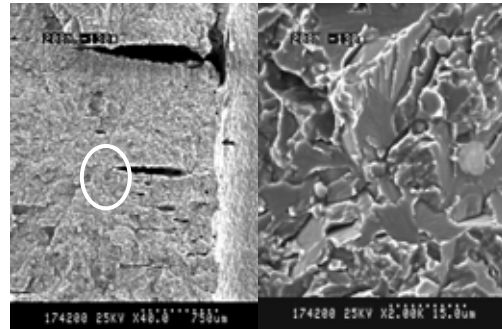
Typical fracture surface showing SIC type of cleavage initiation site
